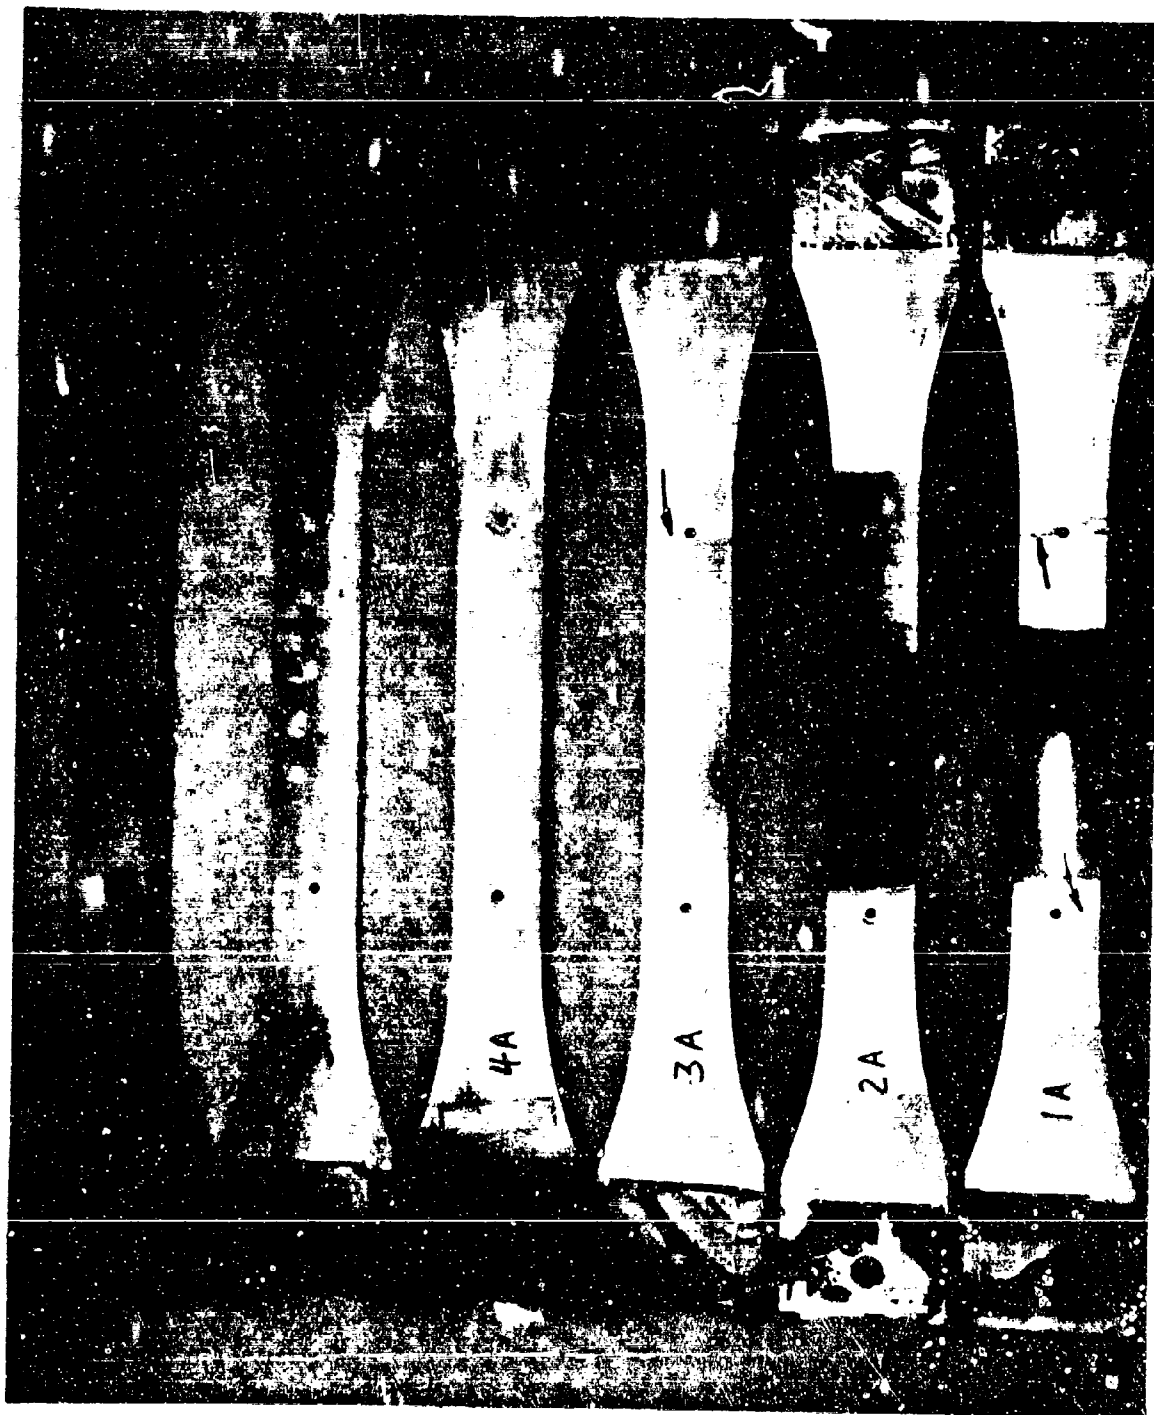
View of Side "A" of Specimens After Test Failures in 1 and 3.
